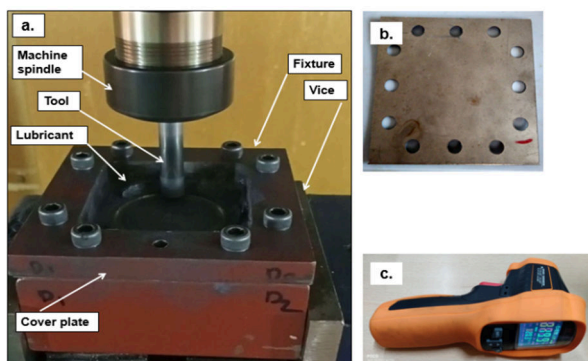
(a) The sheet during processing with OKS MoS2 Paste Lubricant (b) The sheet provided with desired dimension (c) Infrared non-contact temperature measurement gun
